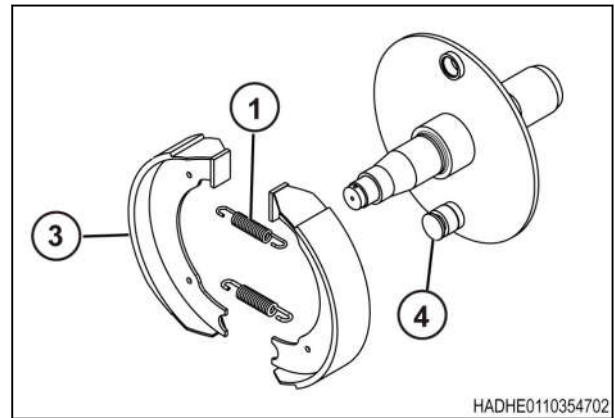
Single axle machines made before serial number AGCxxxxxxJHBxx101
